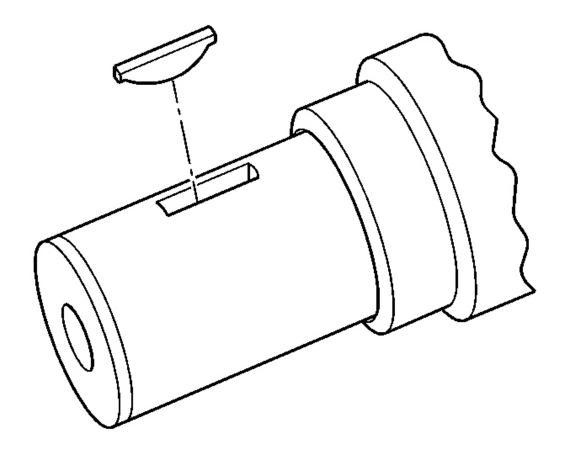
View Of Crankshaft Key & Keyway Courtesy of GENERAL MOTORS CORP.
